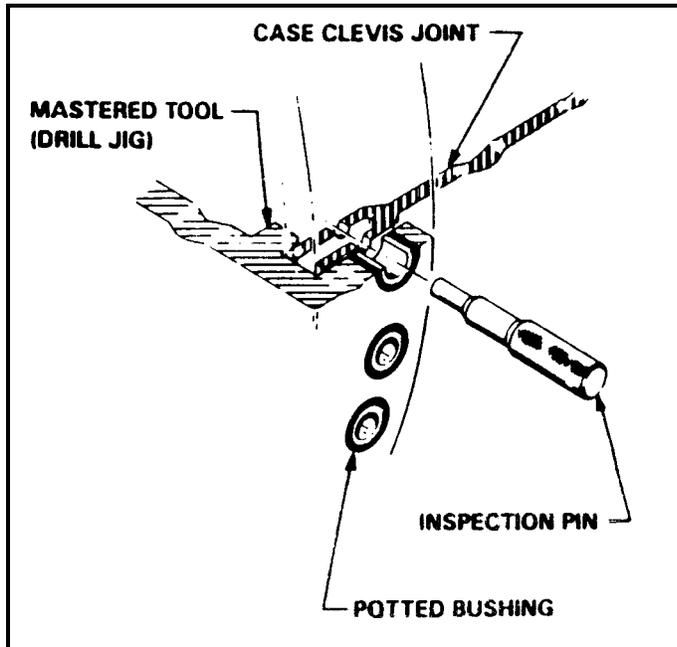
Drilling and Checking Case Clevis Joint Using Mastered Tool
